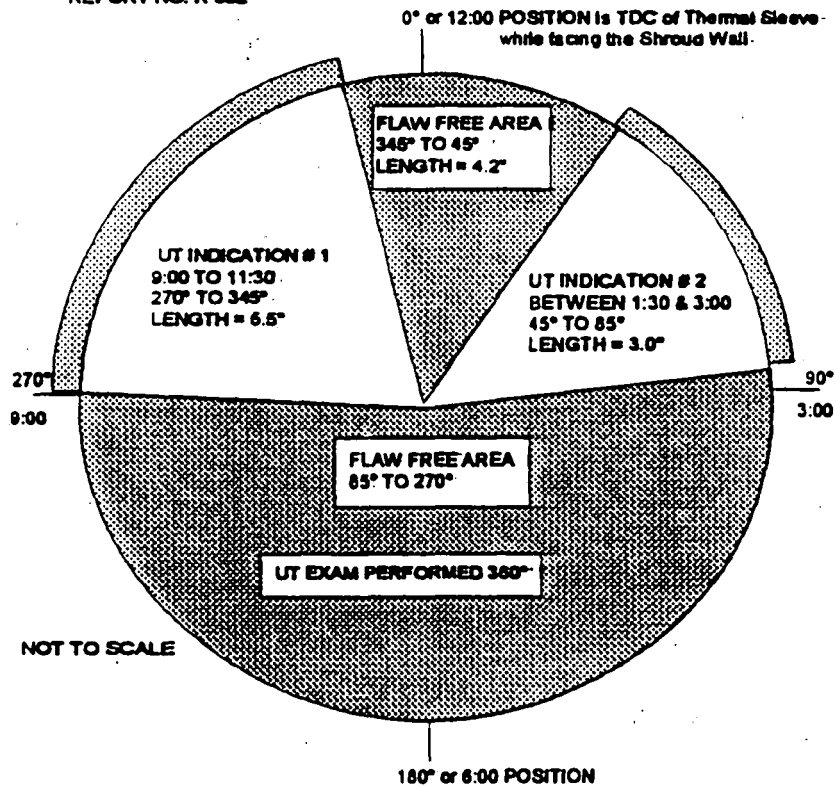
Ultrasonic Testing Examination Area And Flaw Location Thermal Sleeve Weld 2
